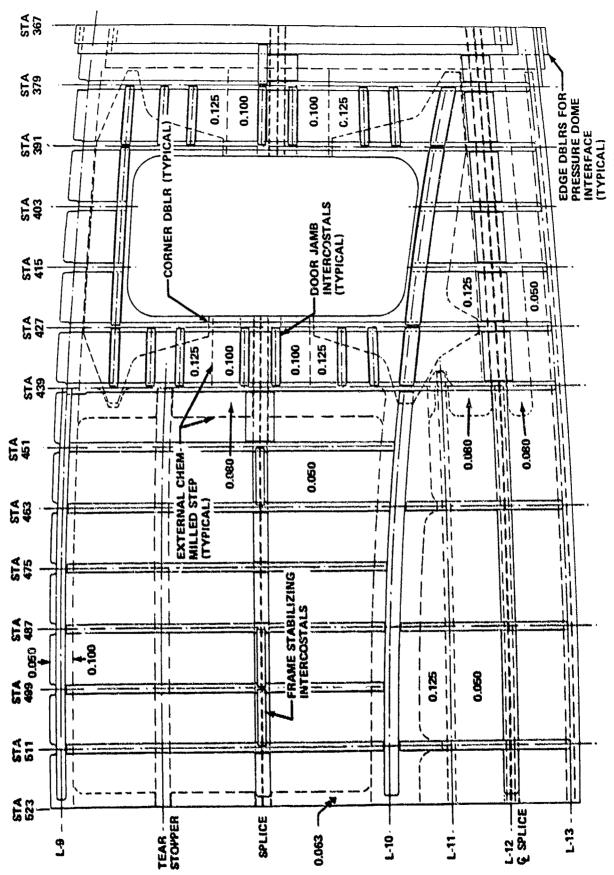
NONCONSTANT SECTION LEFT SIDE PANEL WITH DOOR CUTOUT AND JAMB
